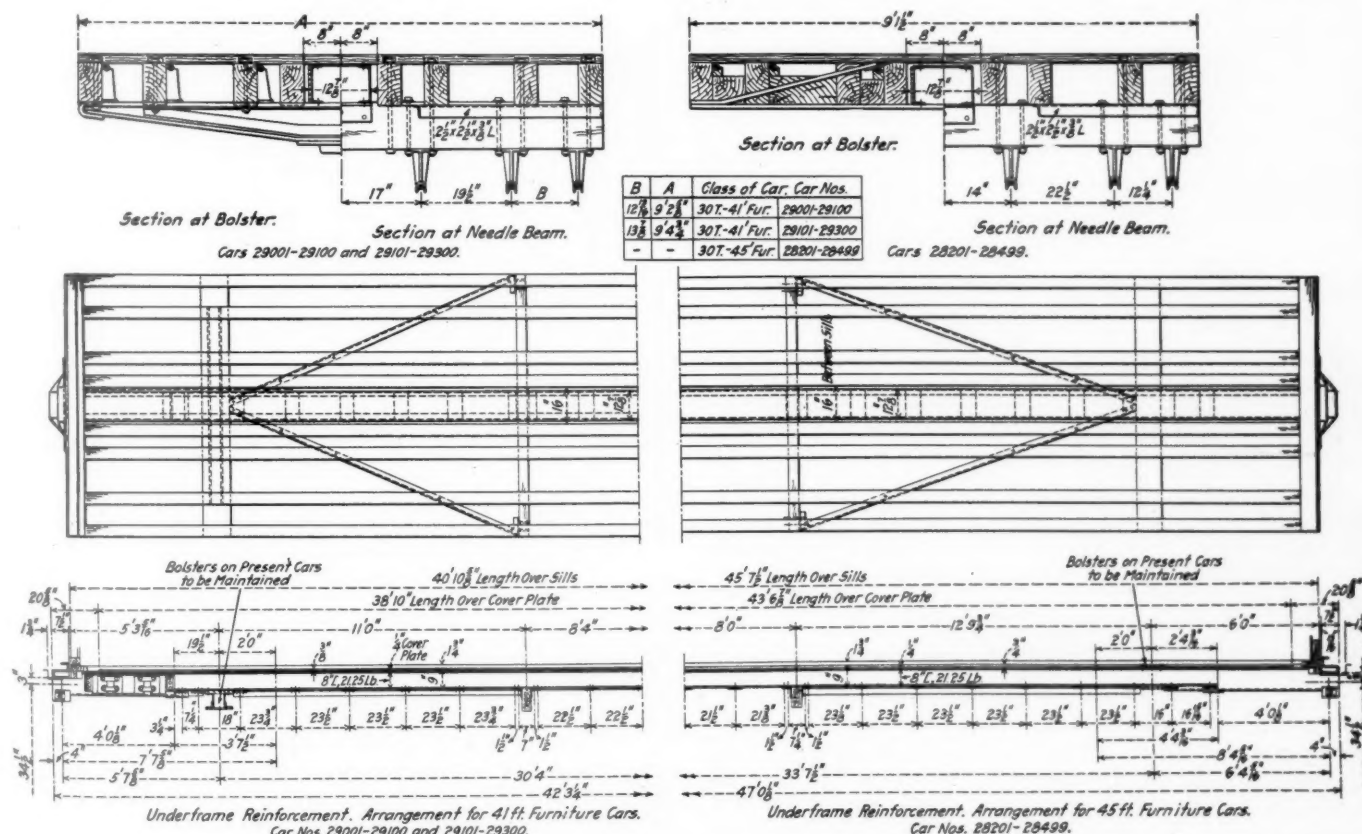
Underframe Reinforcement for Long Wooden Furniture Cars
